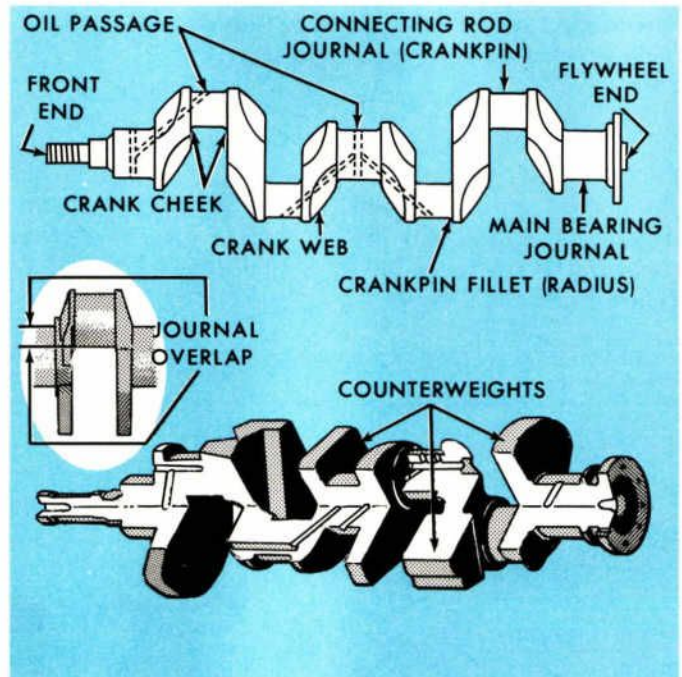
TYPICAL CRANKSHAFT DESIGN
